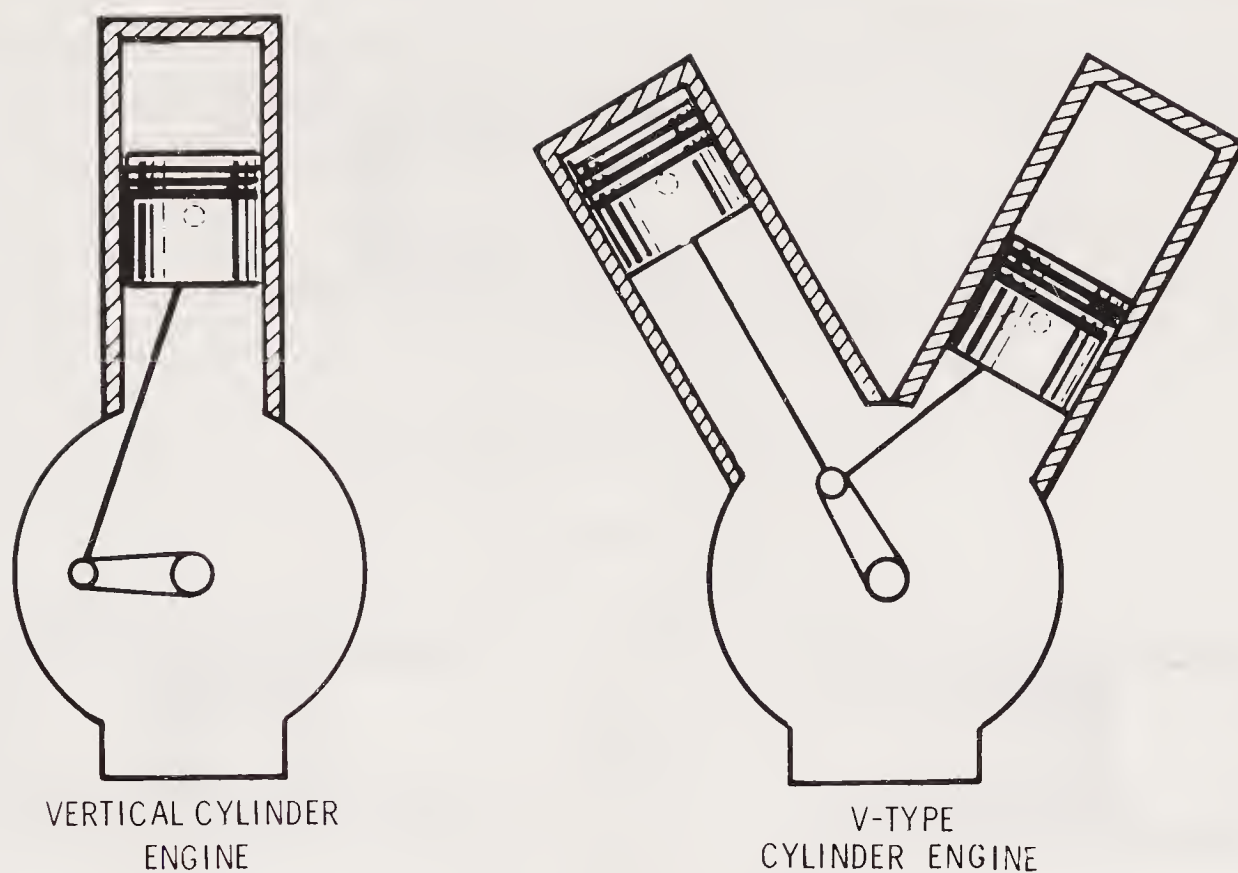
Illustrating the cylinder arrangement in vertical (in-line) and V-type engines.
